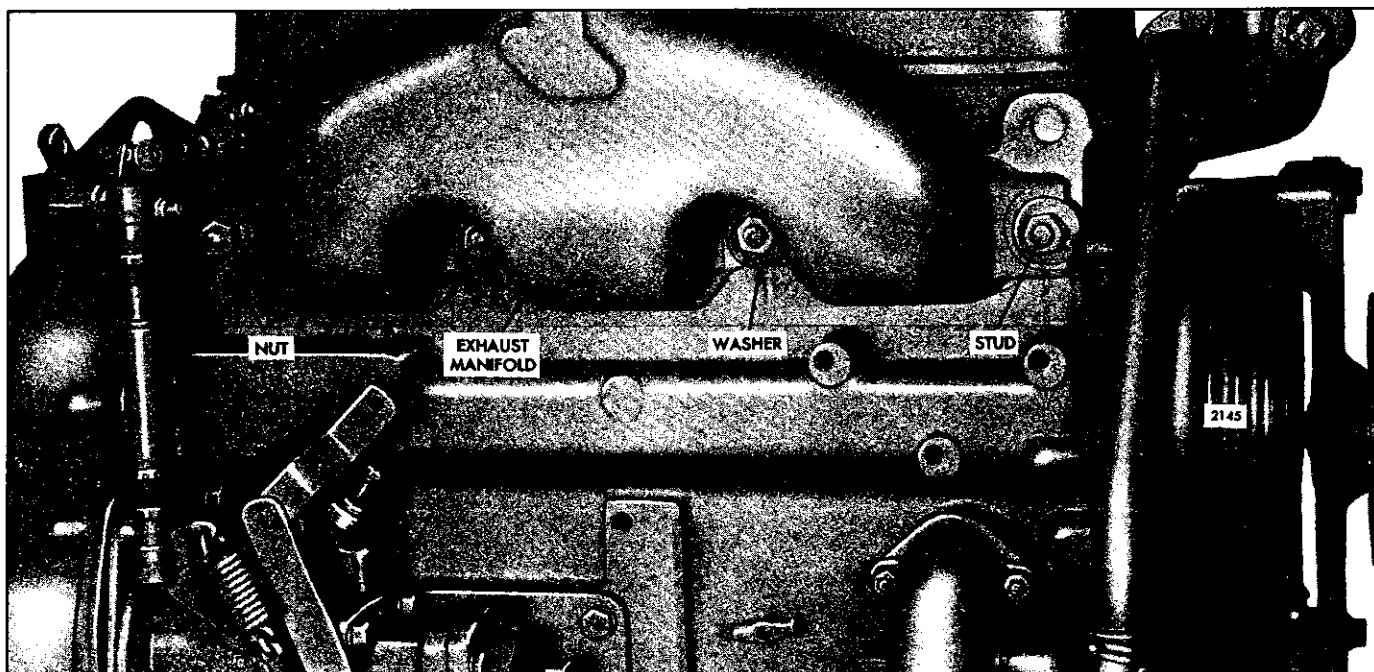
Typical Air-Cooled Exhaust Manifold (Square Flange) Mounting
